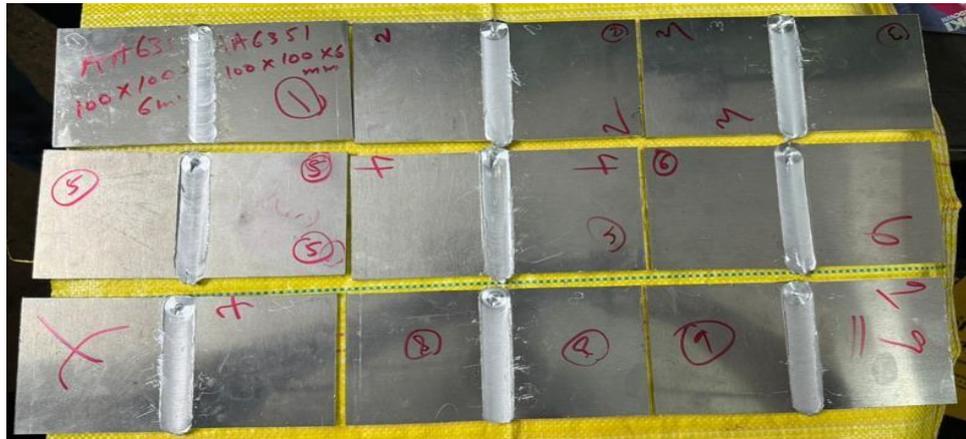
Photograph of fabricated FSW joints according to Taguchi design matrix
